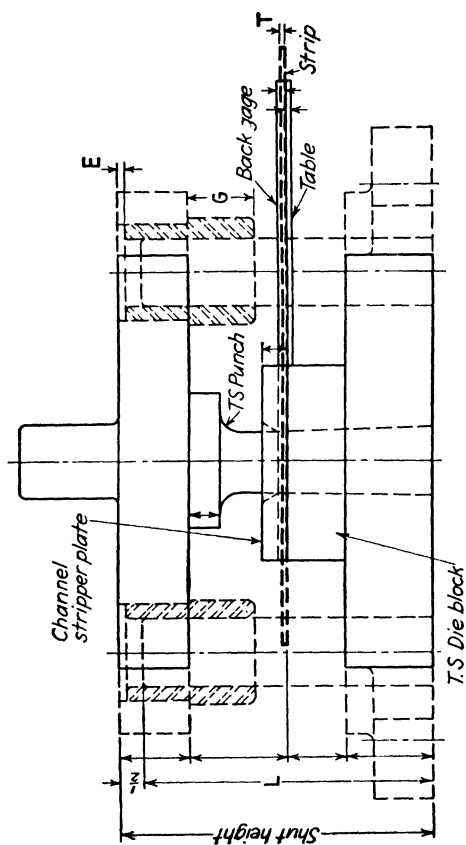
Plain blanking punch and die in which the punch is “stripped” by a positive channel-stripper plate. This type of die can be fed rapidly by hand because it has an automatic stop finger.
